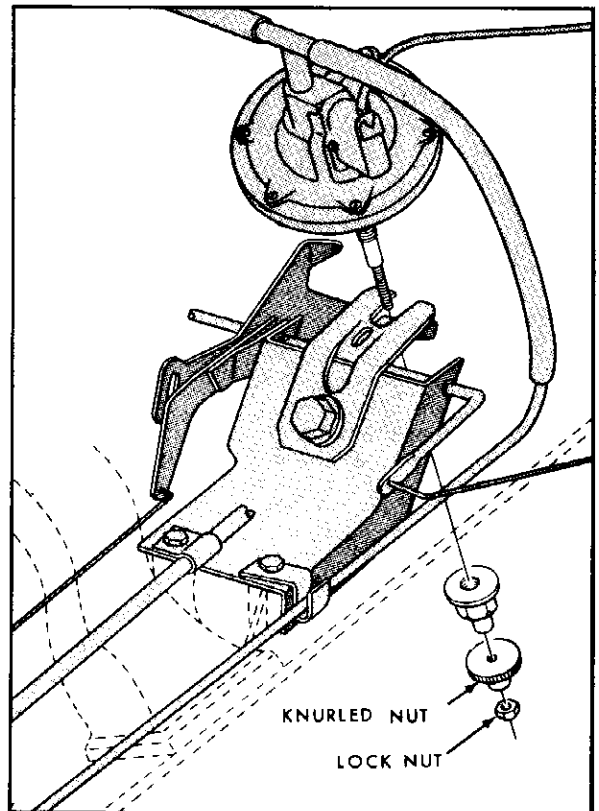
C-3—Carburetor Fast Idle Control—(61LT-8817)
